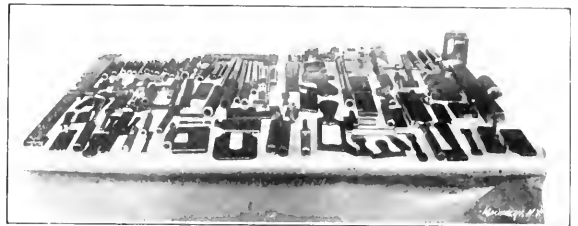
Collection of Gages used in Inspection of Pistol Parts.
